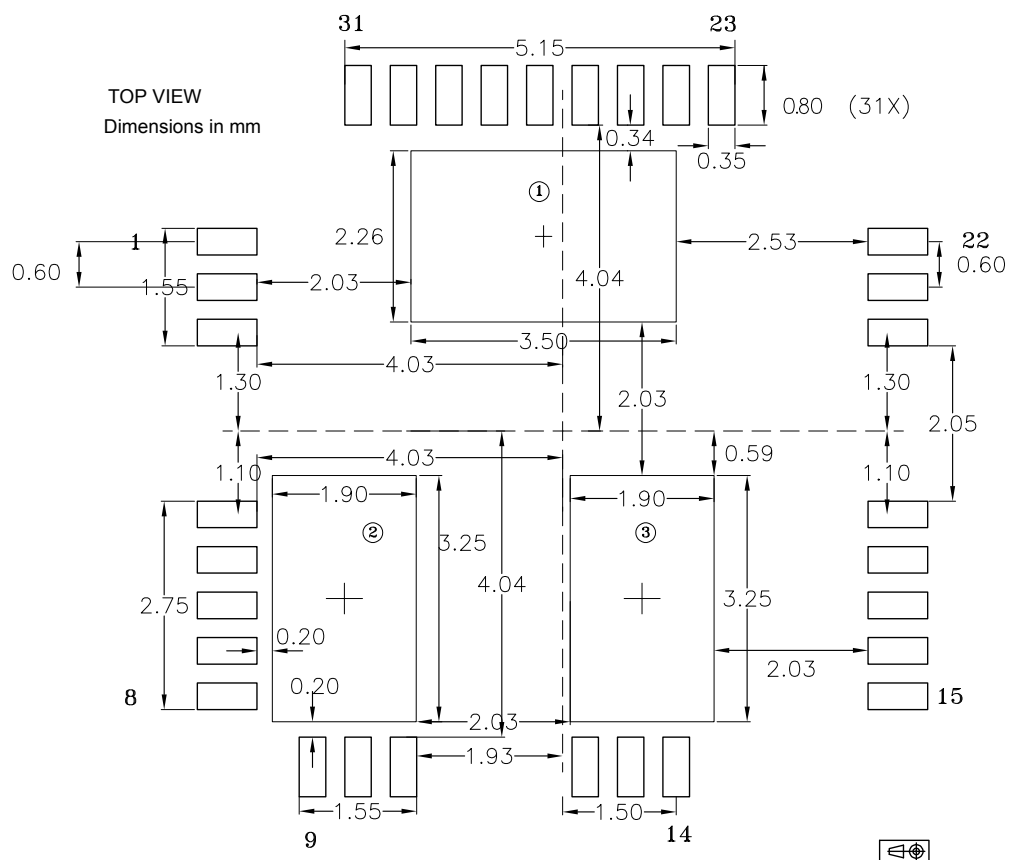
QFN 9 x 9 x 1 mm package dimensions
